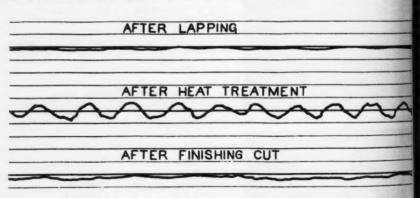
Charts of a helical gear after cutting, after hardening, and after lapping.
